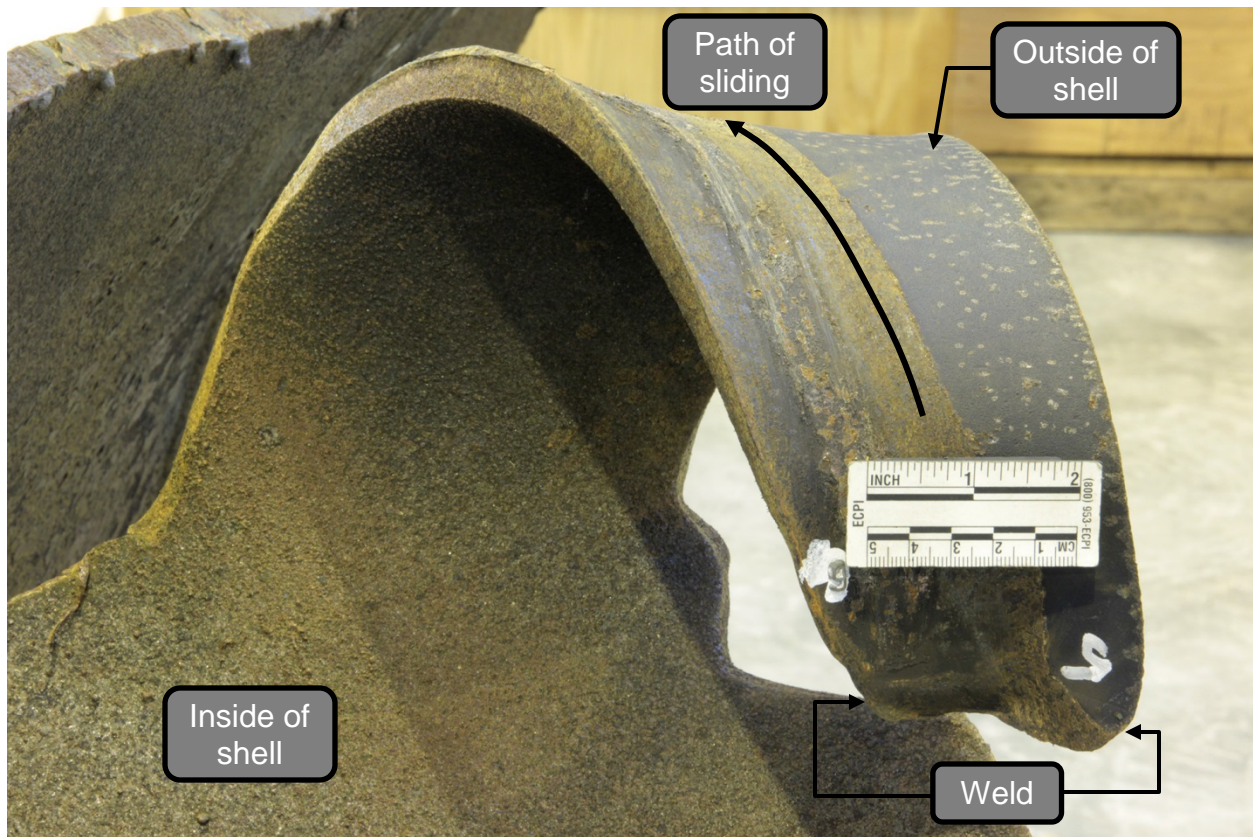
Image of the material between the two tears peeled inward on the A-end side of the weld where the breach initiated.
